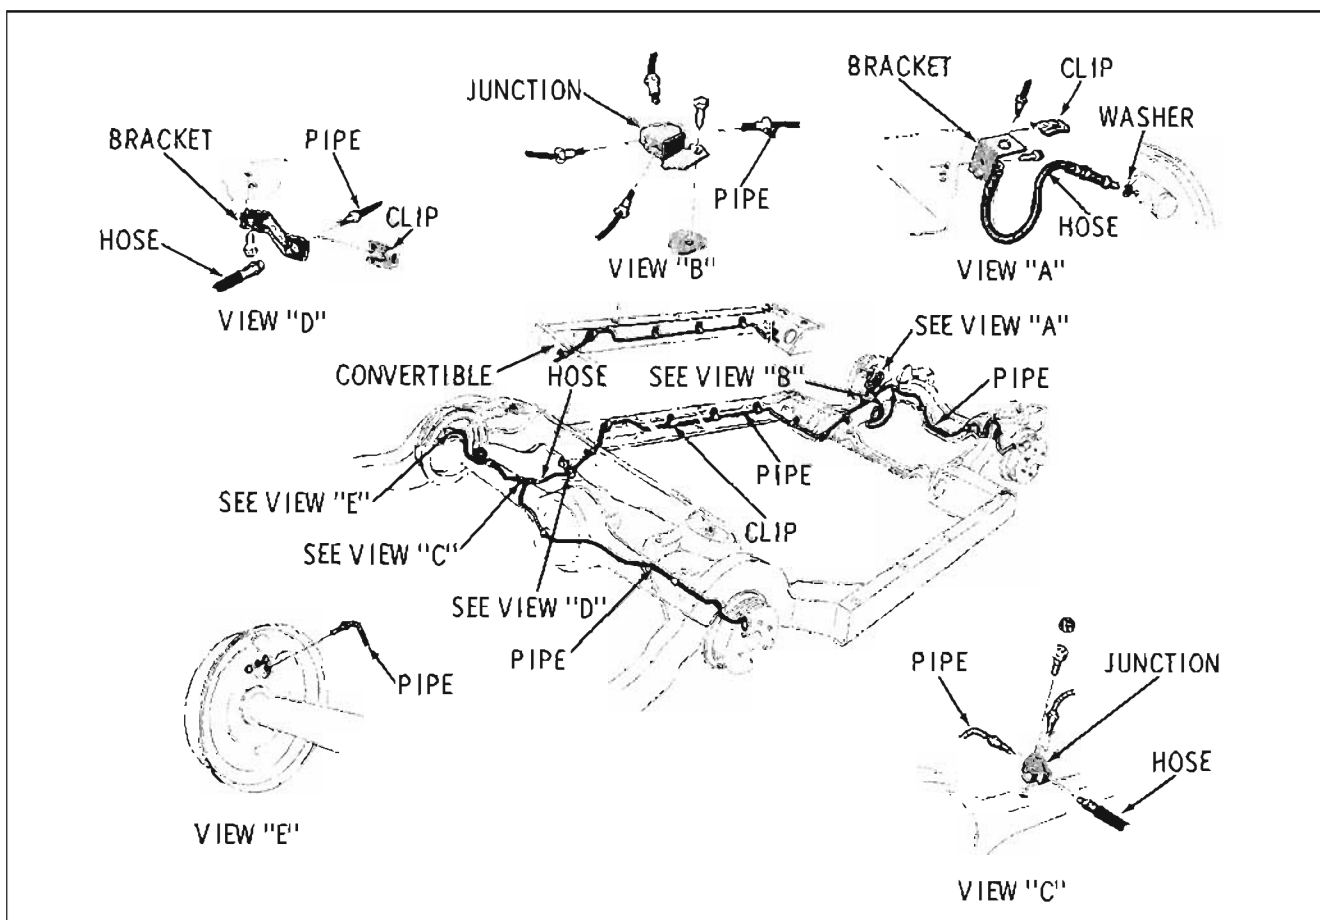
Brake Lines (33, 34, 35, 36, 38 & 39 Series)
